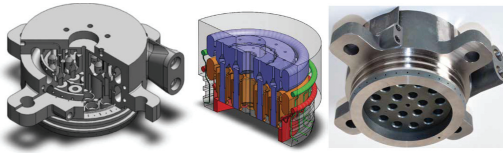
Injector head design for additive manufacturing and manufactured Injector head for SMILE project from DLR[15].
